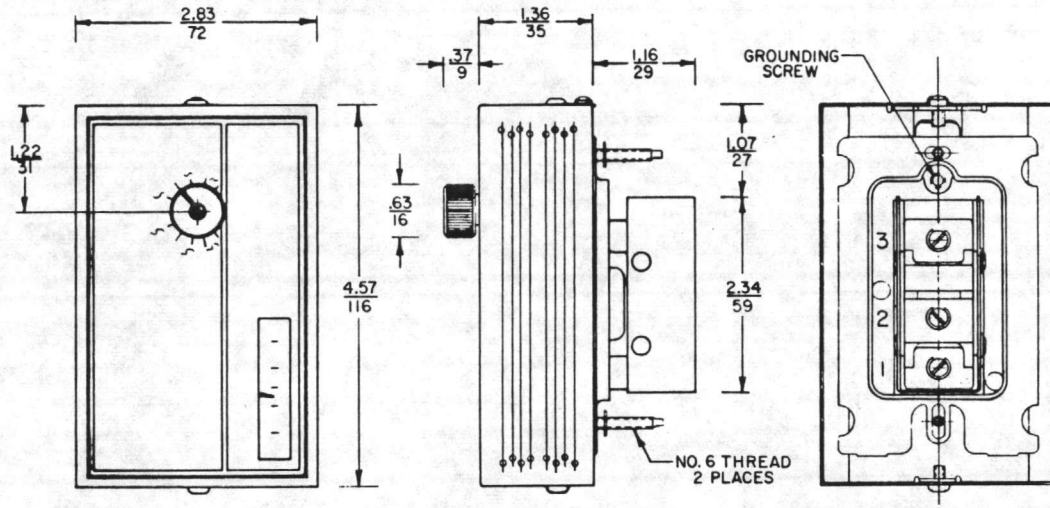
Line drawing illustrating method of mounting a vertical thermostat to outlet box. Also shown is a solid vertical faceplate for concealed adjustment when desired.
